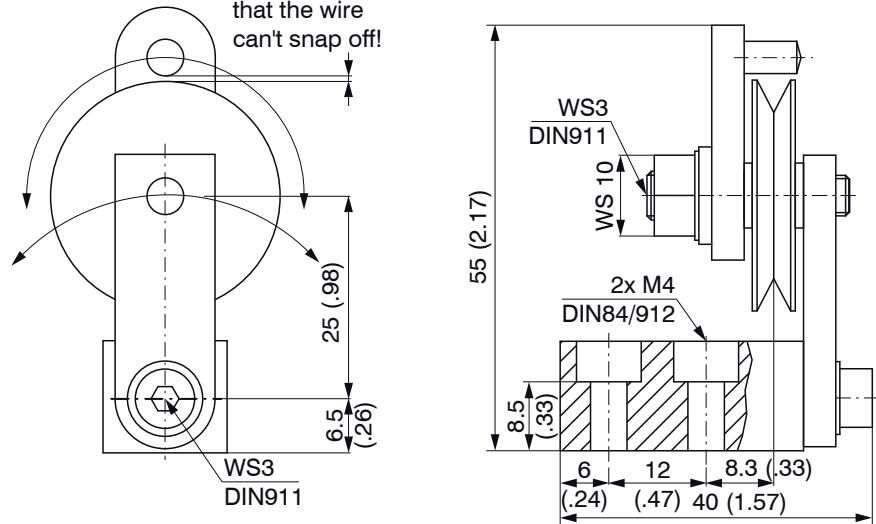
Guide pulley TR1-WDS with mounting socket, dimensions in mm (inches), not to scale
